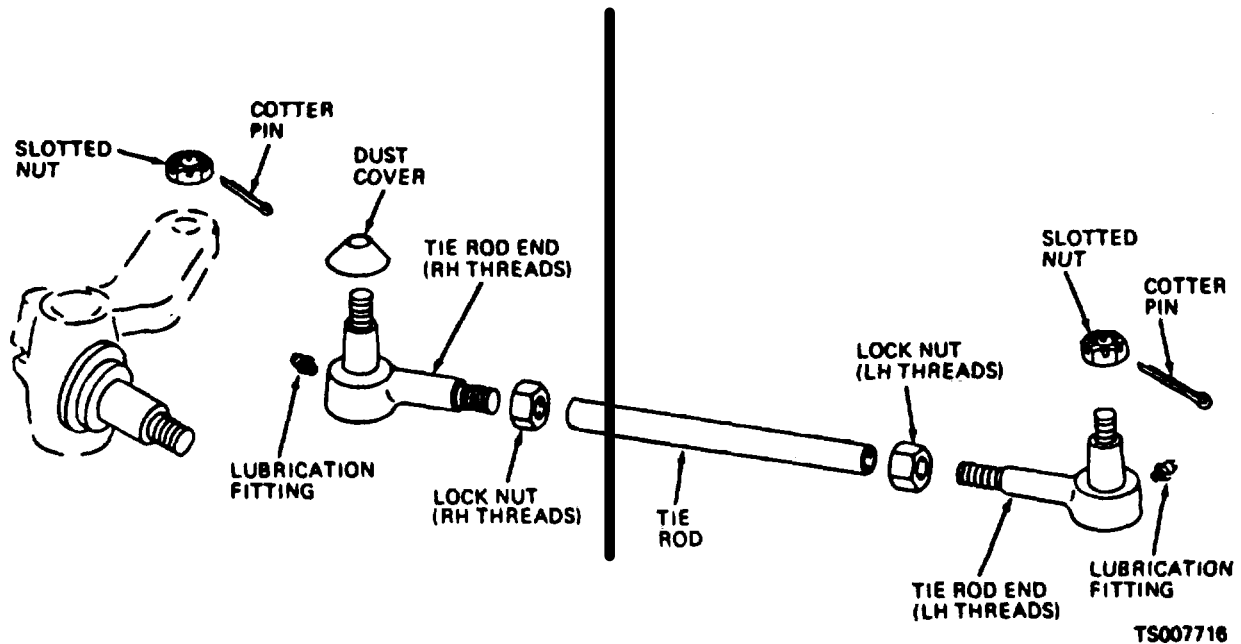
Tie Rod, Disassembly and Reassembly.
